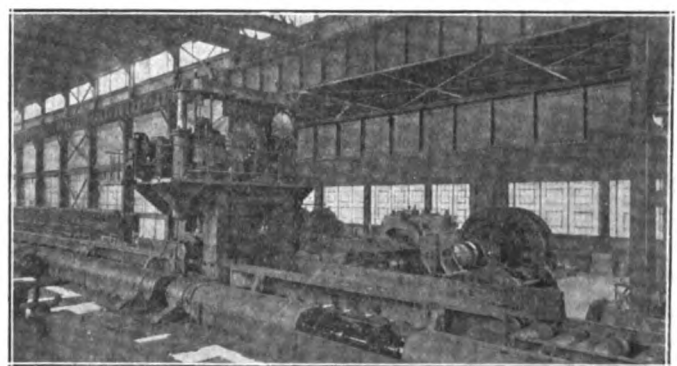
General view of 30-inch universal mill at Mark Manufacturing Company.
